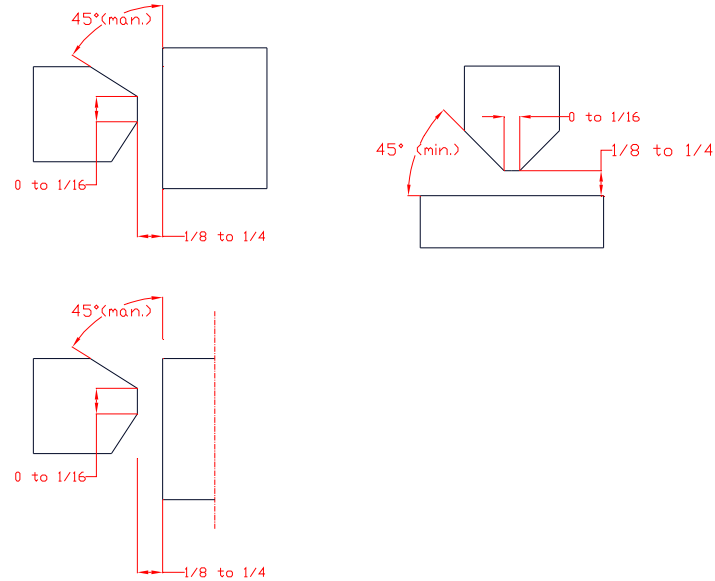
Double-bevel groove joints for welding both sides.
